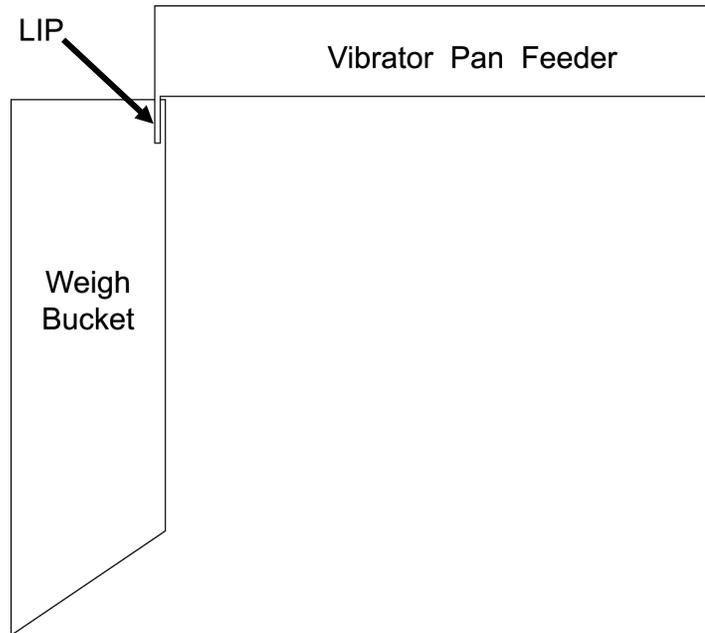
Positioning the Pan Feeder Lip Inside the Weigh Bucket
